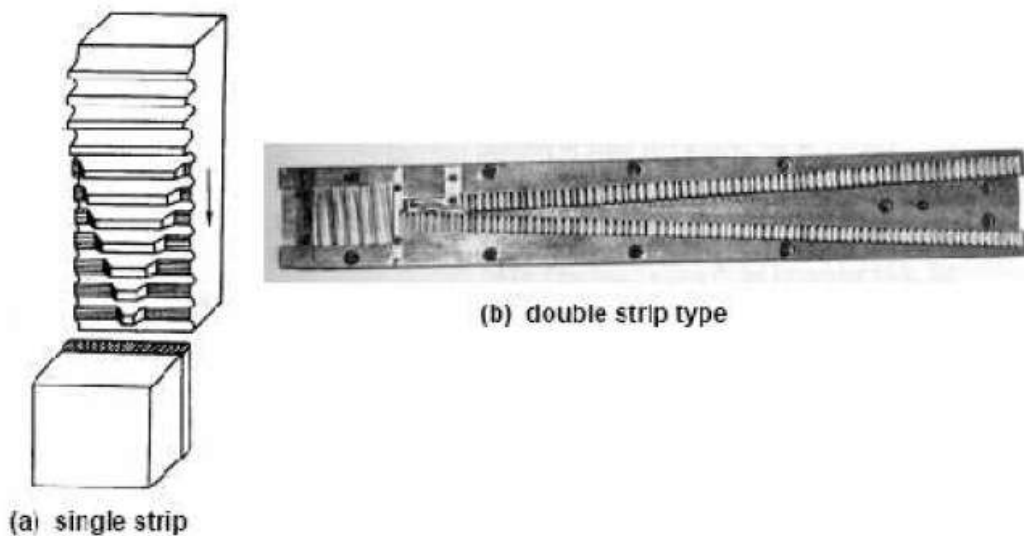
Progressive cut type broaches; (a) single bar and (b) double bar type
